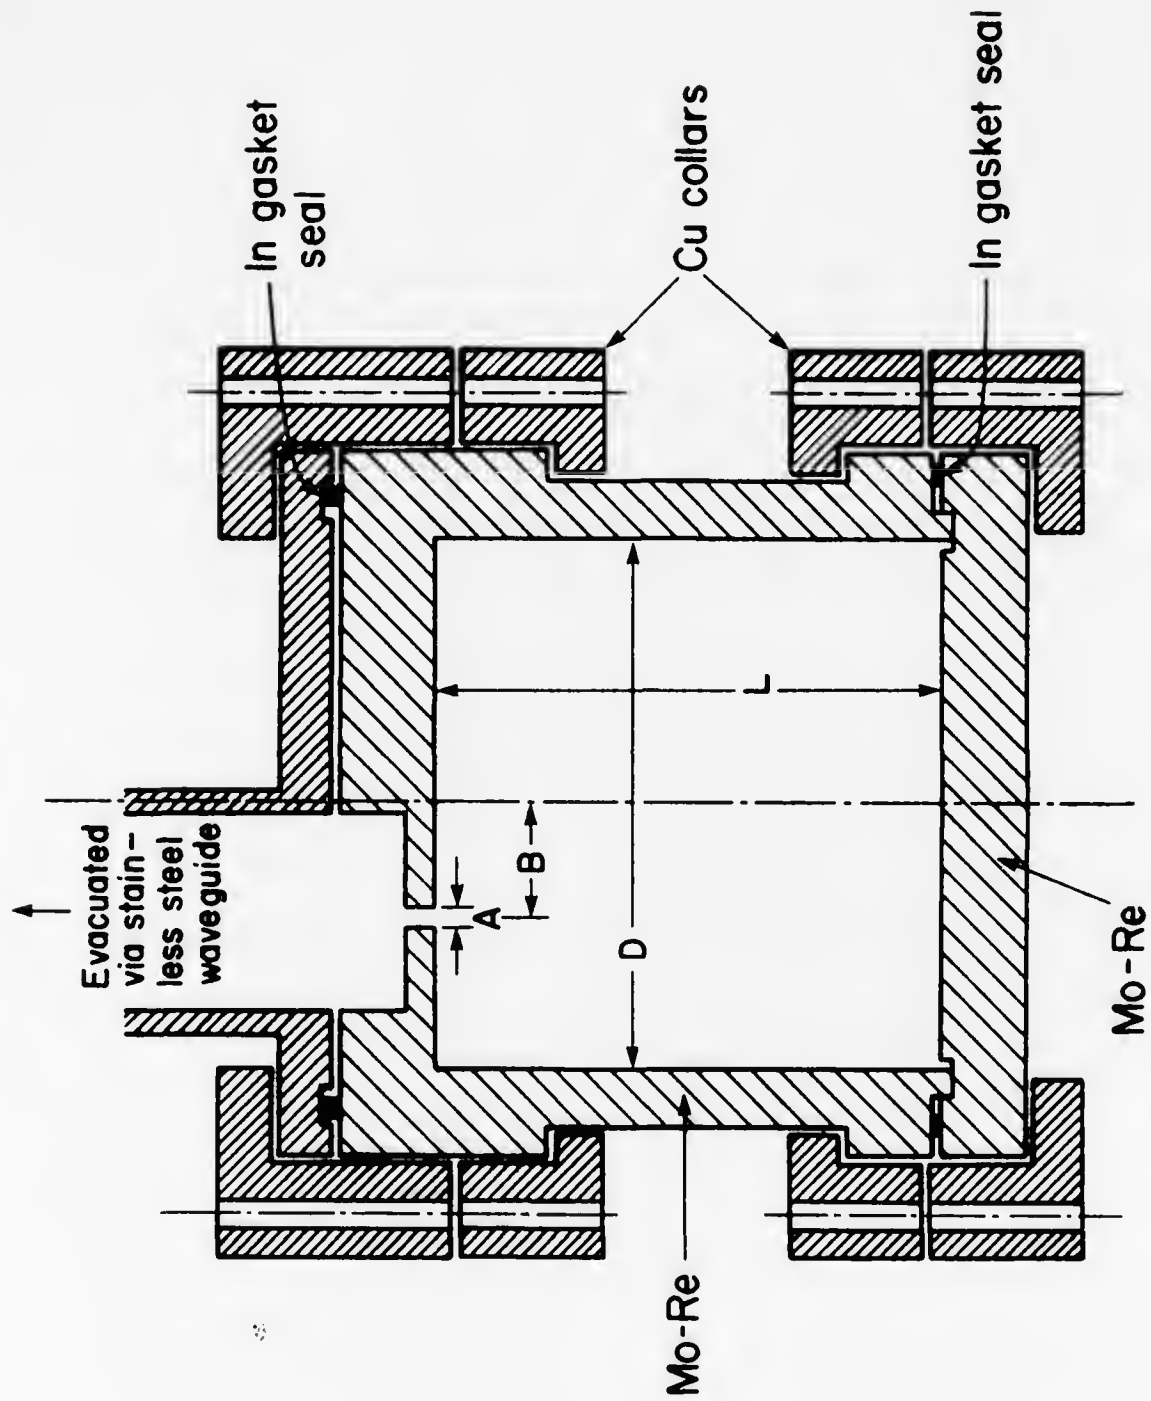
Cross-sectional view showing Cavity Design and Assembly.
